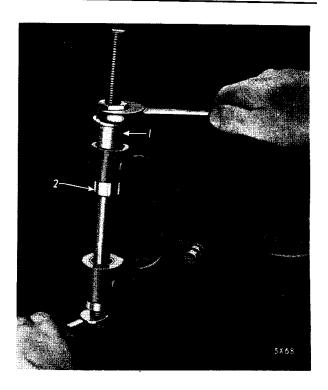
Removing King Pin Bushing (Elliott Type Axle)
